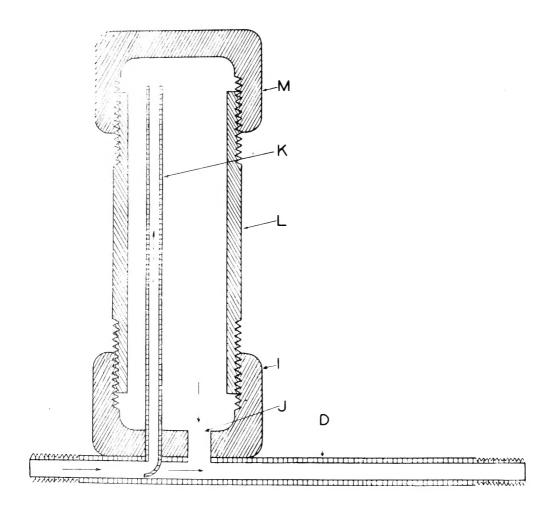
Diagrammatic view of insecticide container assembly (H).
